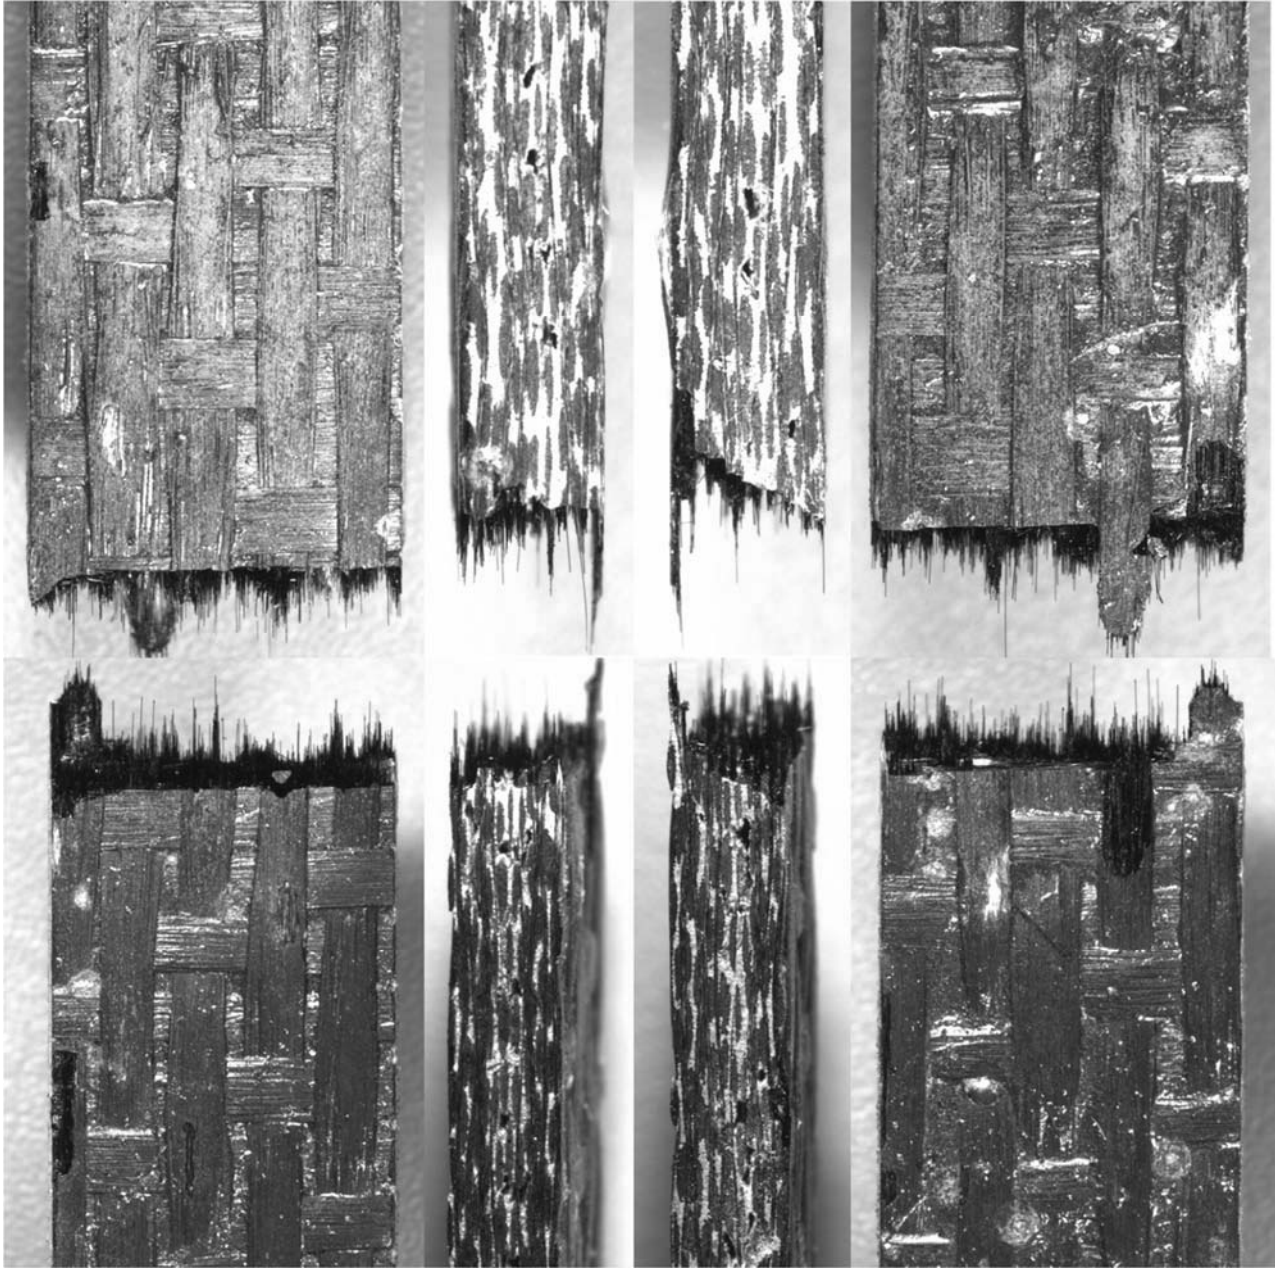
Top and bottom fracture surfaces of specimen 16-046, tested in fatigue at 1200°C in steam. $\sigma_{\max} = 110$ MPa, $N_f > 200,000$.
